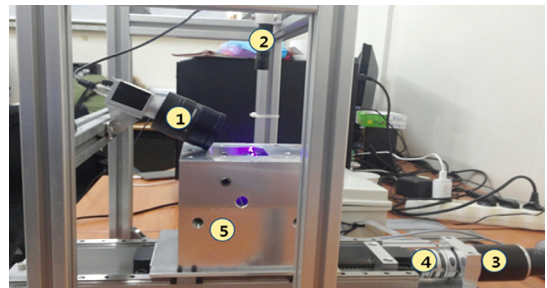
Valve and pivot height measurement system: ① Camera, ② Laser line projector, ③ Motor, ④ Ball screw, ⑤ Single cylinder head
